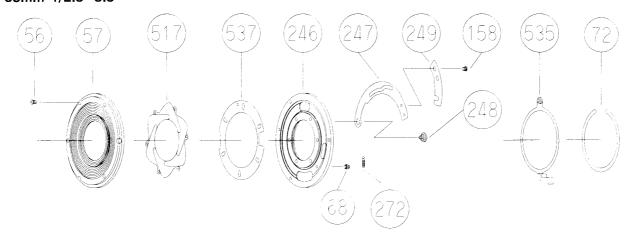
Konica Diaphragm Housing Assembly (Ref. 533)
